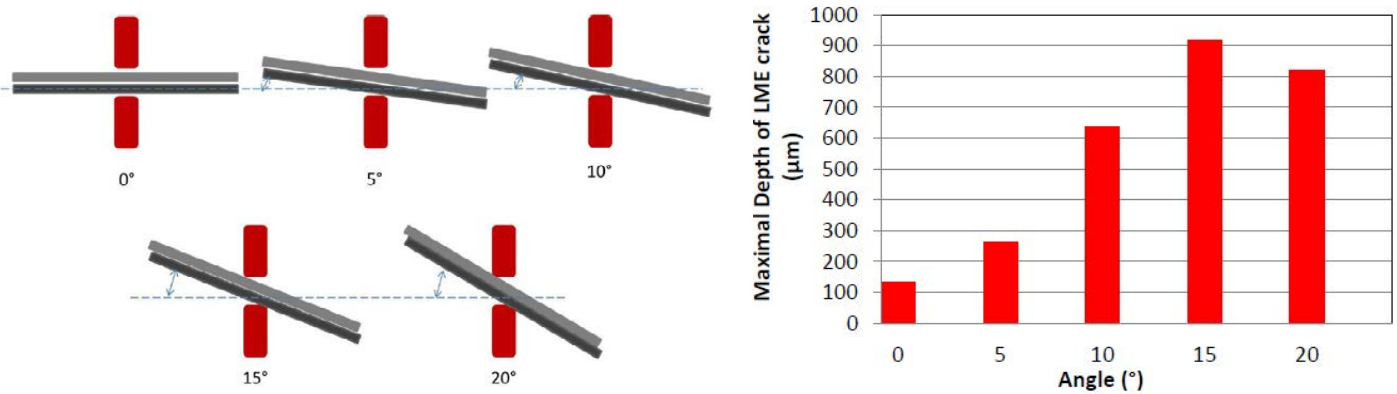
Impact of the angular misalignment of the welding electrode on LME crack sizes occurrence.
